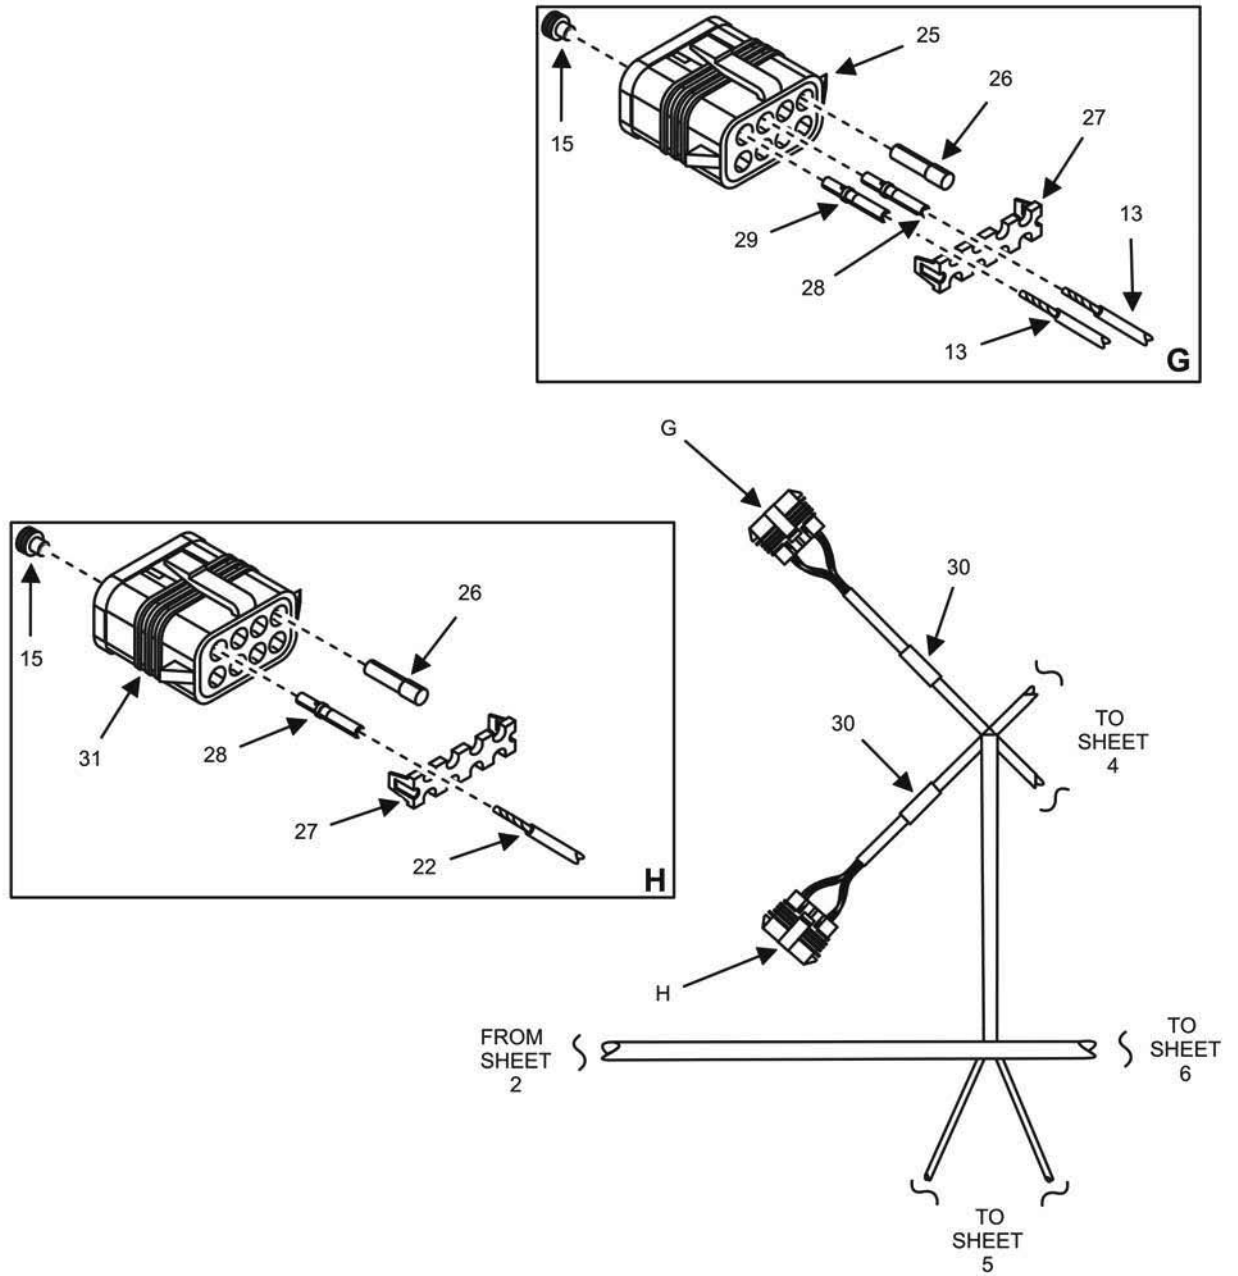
Engine Wiring Harness (Sheet 3 of 14).
